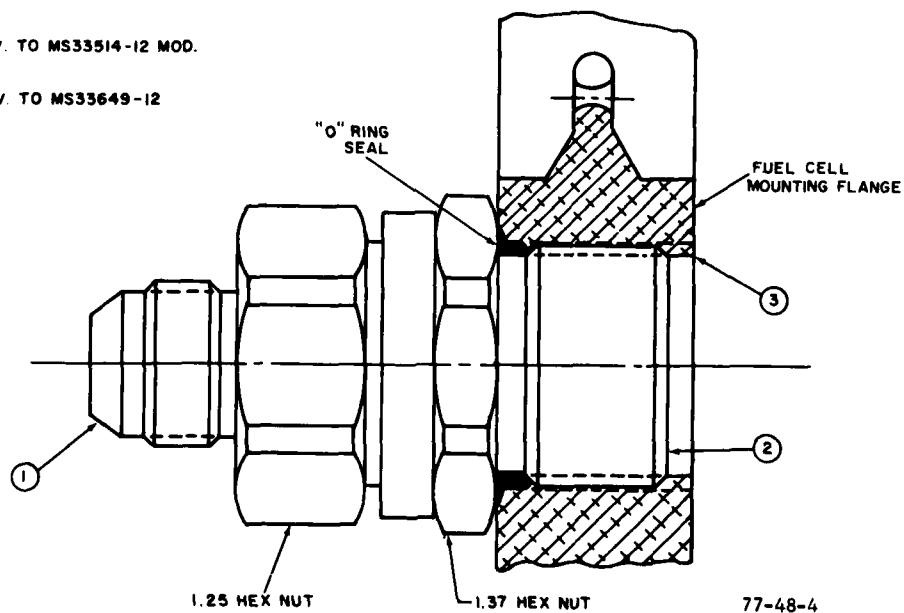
FRANGIBLE COUPLING MOUNTED TO FUEL CELL MOUNTING FLANGE
